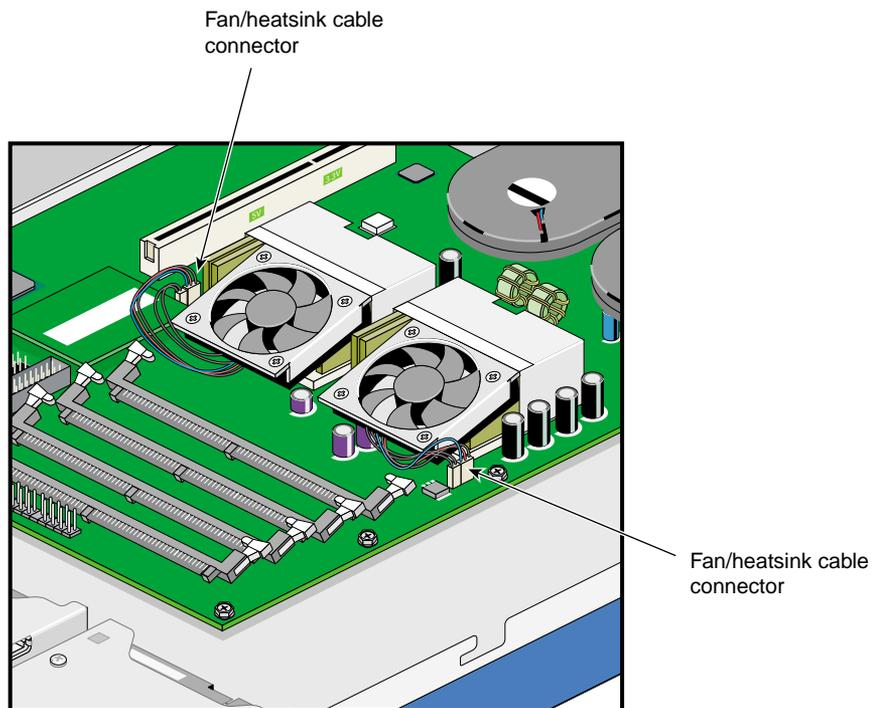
Location of the Fan/Heatsink Cable Connector
